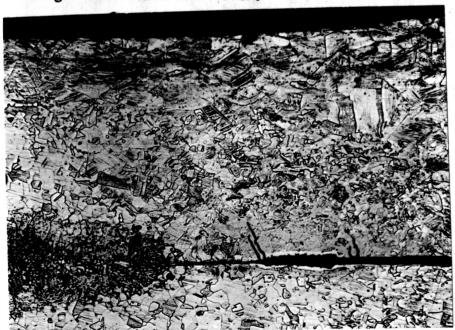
Same spot weld as shown in Fig. 4 except at a higher magnification to show the fatigue crack in greater detail. The crack length is 0.004" or 46% of the sheet thickness.
